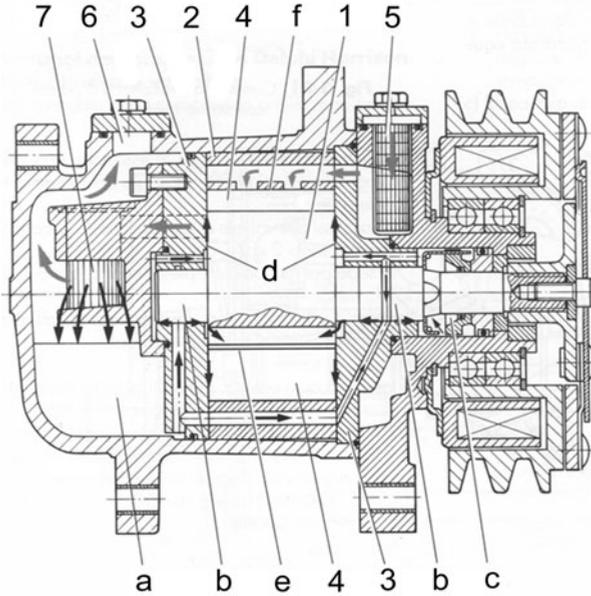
Lubricant system for rotating compressor with blades. Components and parts: (a) oil collection chamber, (b) rotor bearing pins, (c) oil seal, (d) head rotor bearings, (e) blade bases, (f) blades cylinder contact, 1 rotor, 2 stator, 3 heads, 4 blades, 5 refrigerant input connection, 6 refrigerant exit connection, 7 oil separator.
